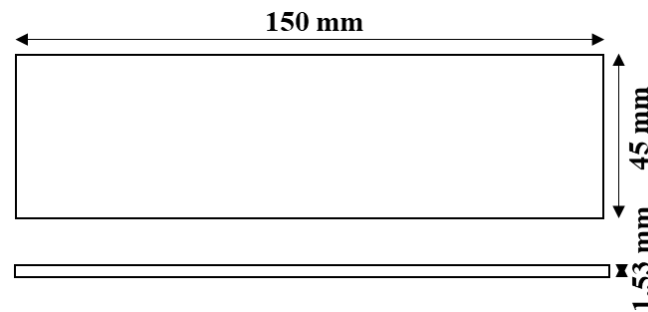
Dimensions of the employed rectangular samples for the fatigue and tensile tests.
